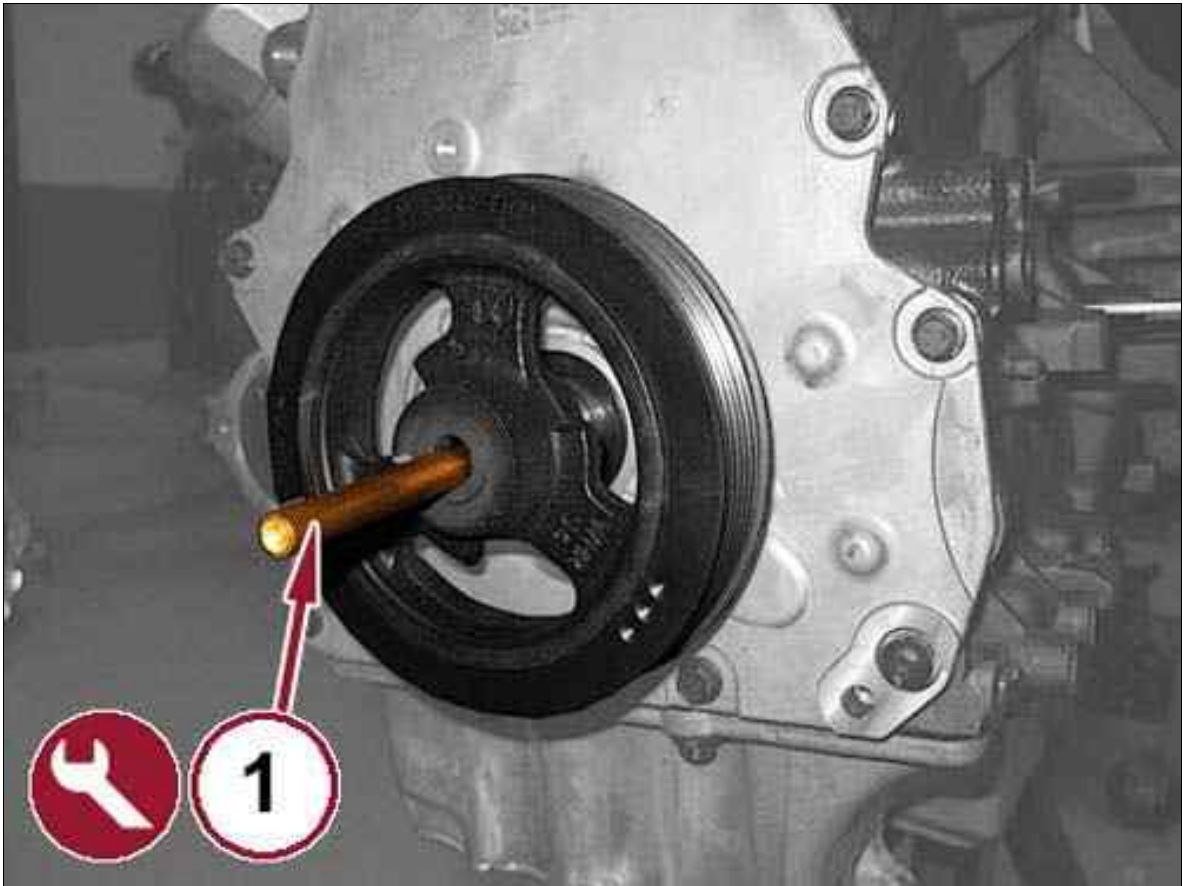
Using Special Tool At Crankshaft Pulley & Bolt
